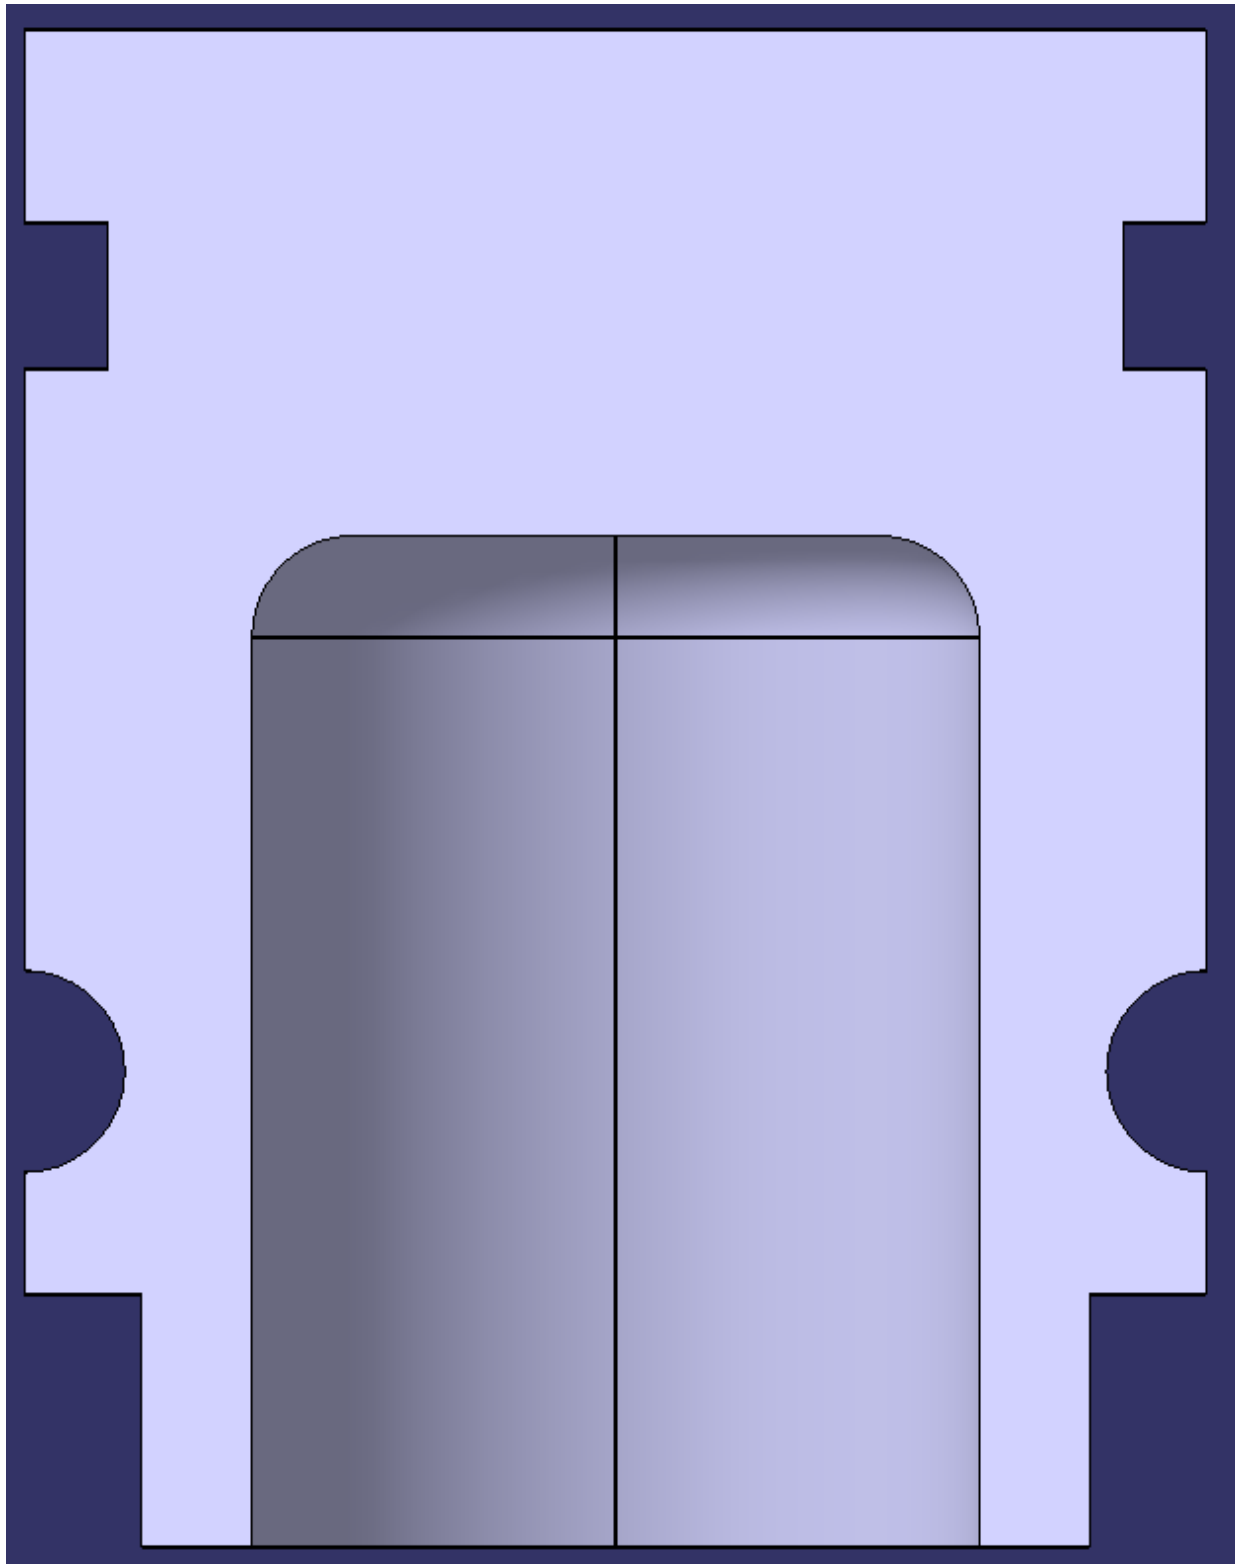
Section View of Option 1 Redesigned Support Tube Plug
